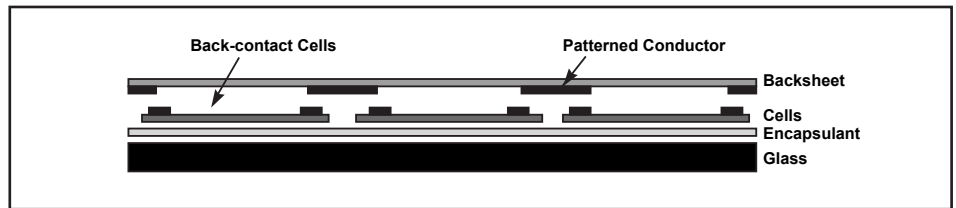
Exploded side view of conductors-on-backsheet monolithic module assembly option.
